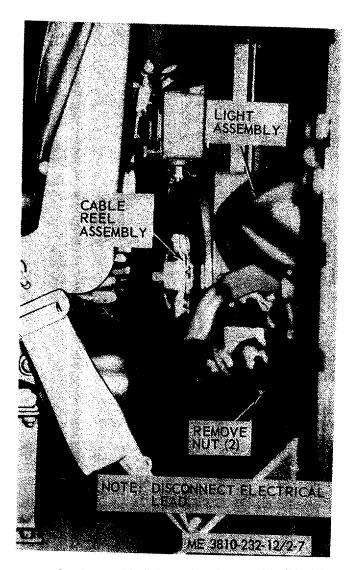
Carrier trouble light and reel assembly (Model 2380).
